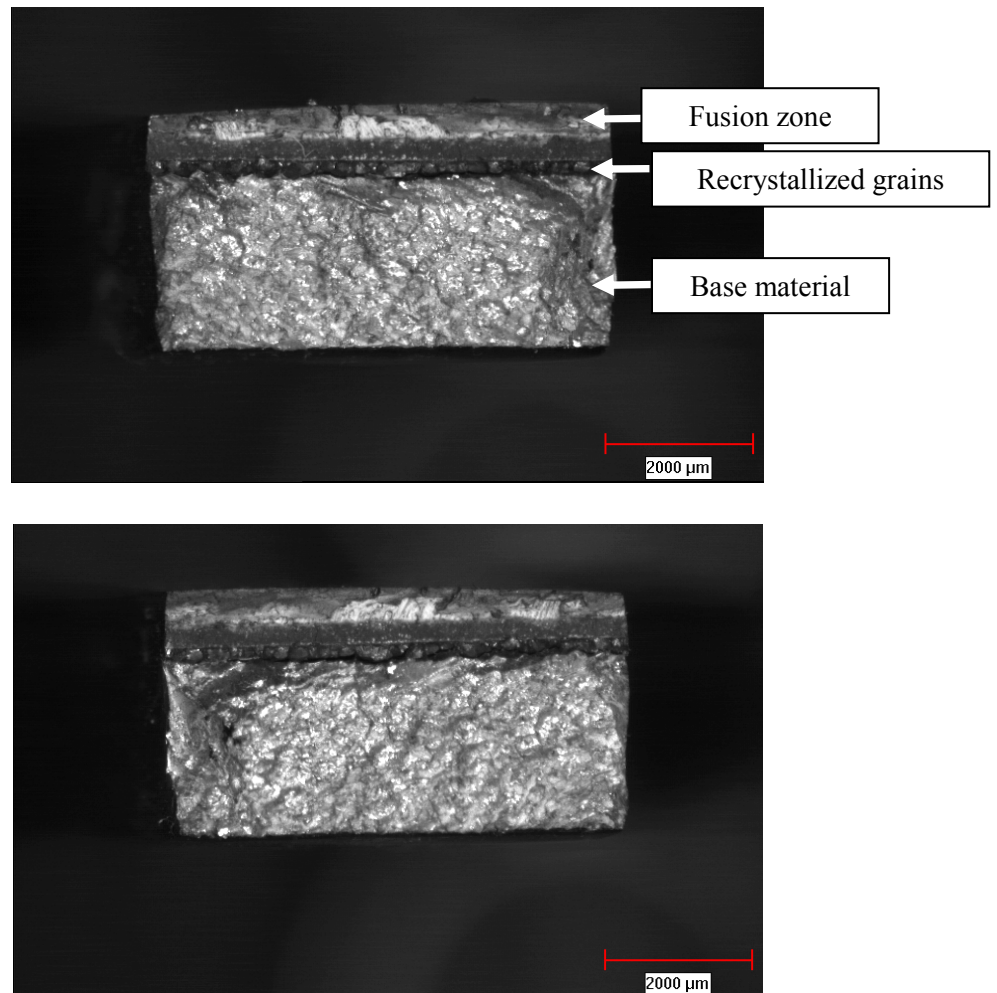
Fracture surfaces of 0.4% strain TMF specimen showing the weld fusion zone and recrystallized grains in the weld heat affected zone.
